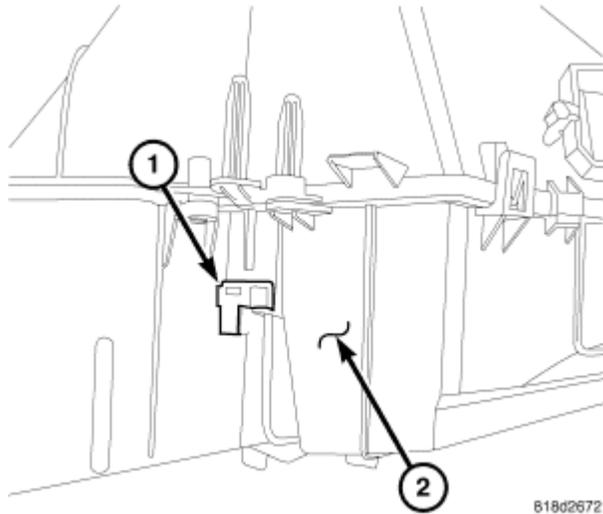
Removing/Installing Evaporator Temperature Sensor From Front Of HVAC Housing
